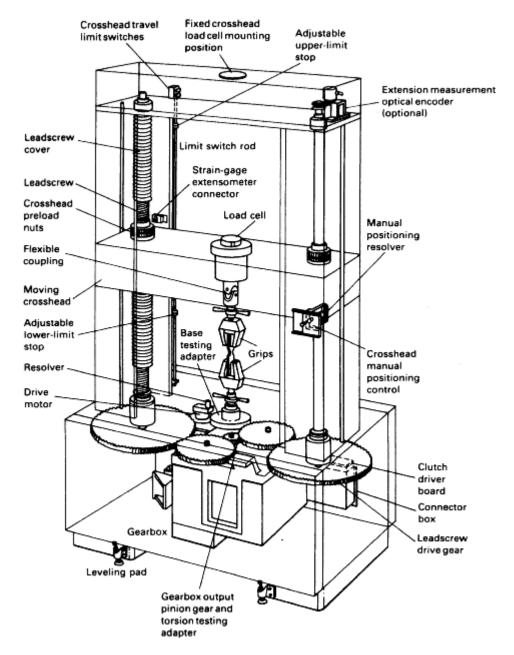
Components of an electromechanical (screw-driven) testing machine. For the configuration shown, moving the lower (intermediate) head upward produces tension in the lower space between the crosshead and the base
